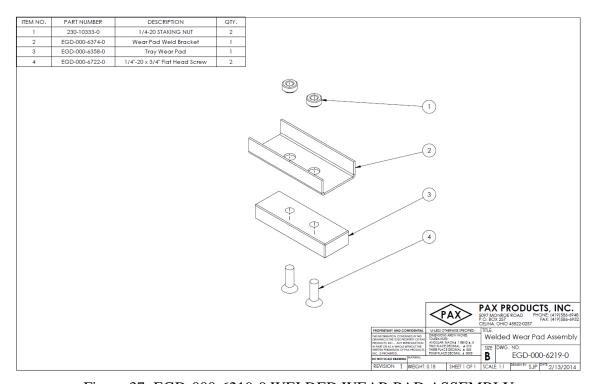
EGD-000-6219-0 WELDED WEAR PAD ASSEMBLY
